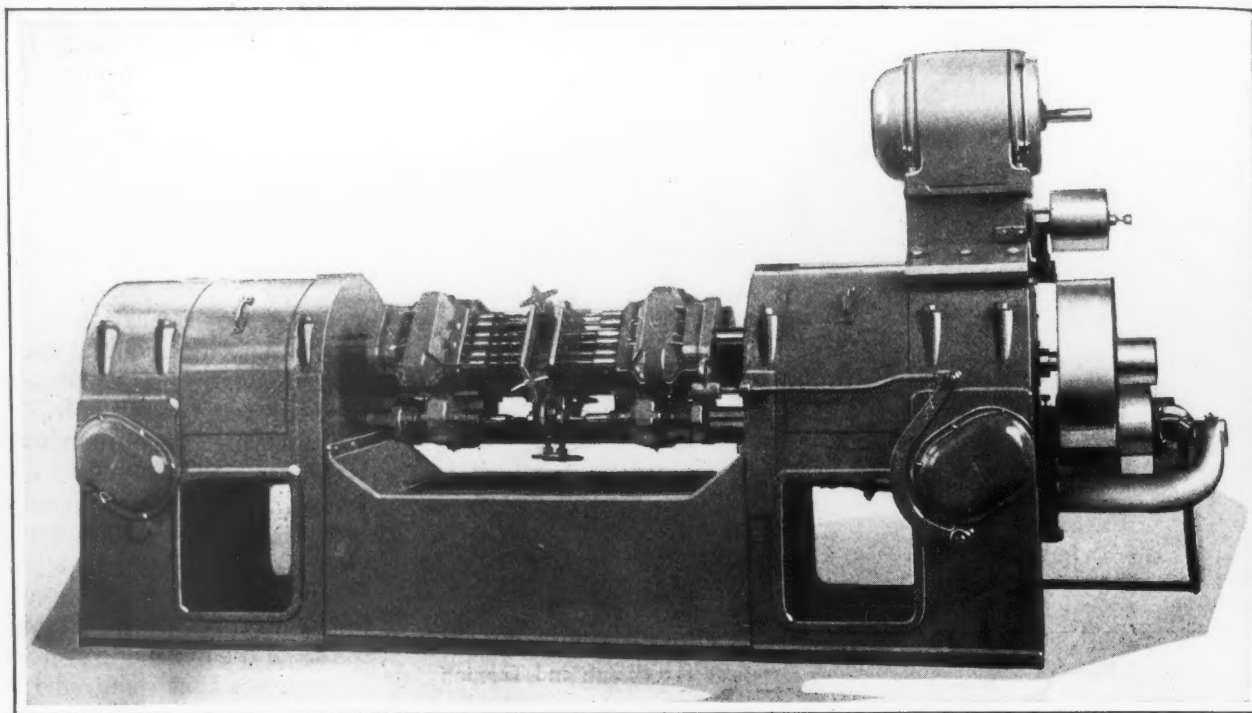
Davis & Thompson Horizontal Machine Designed for Drilling and Reaming Automobile Push-rod Guides
